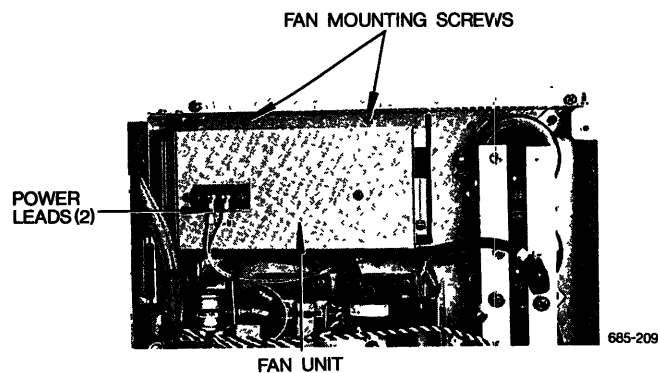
Cooling Fan Assembly of Model CIMR-18.5B, 200 V, 25 kVA
